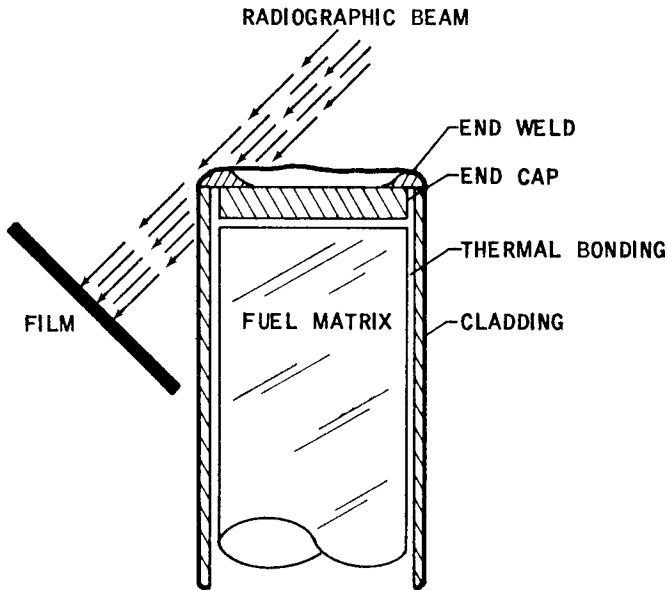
Typical Radiographic Testing of Fuel Element End Weld
